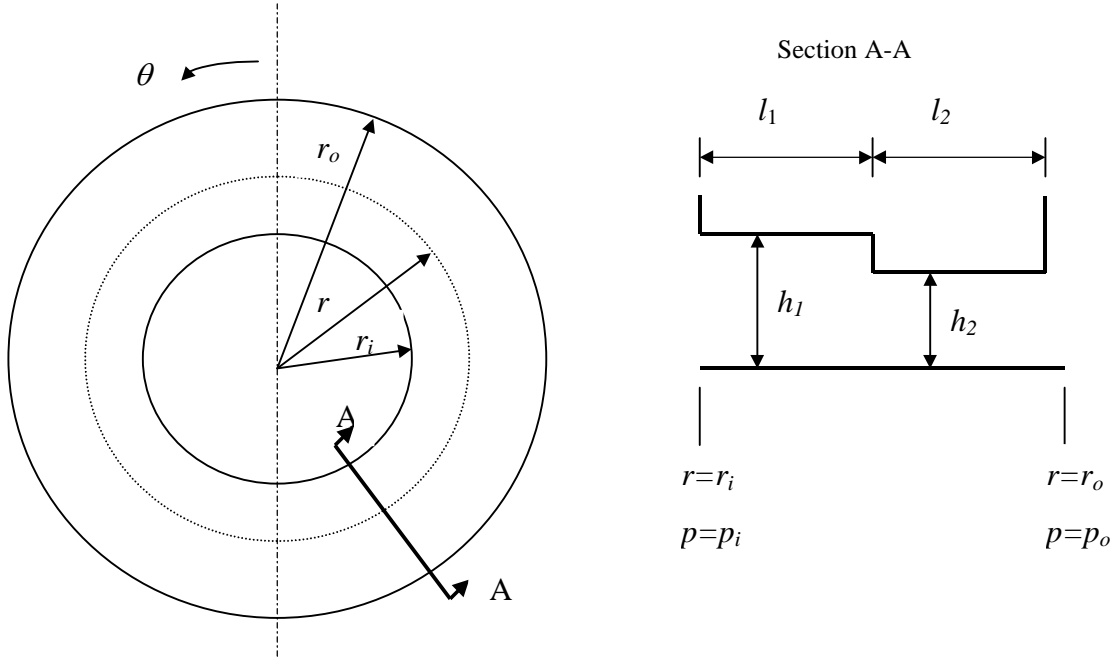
Schematic view of a flat mechanical face seal with outer pressure dam.
